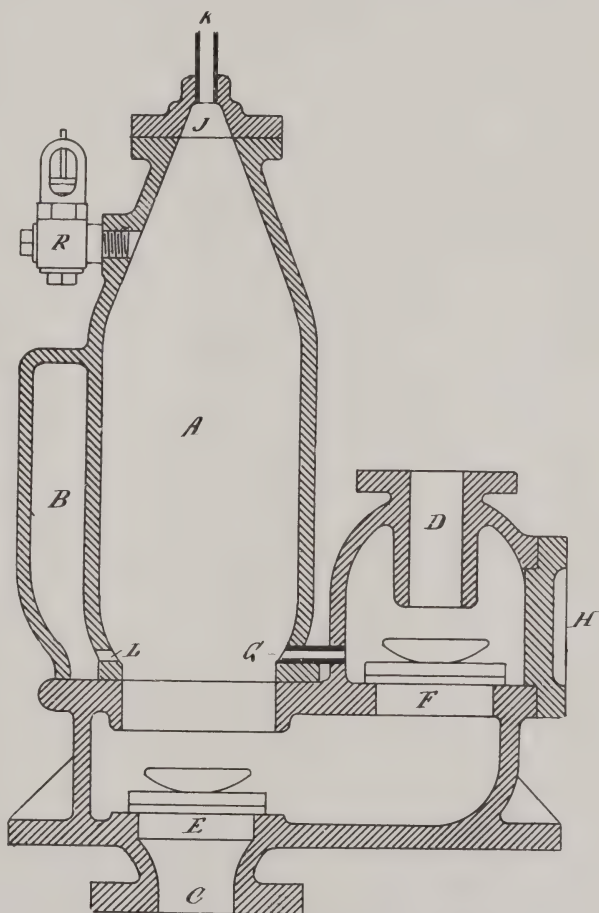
SECTIONAL ELEVATION OF PULSATING STEAM PUMP, WHICH HAS NO STEAM VALVE FOR DISTRIBUTING THE STEAM.
